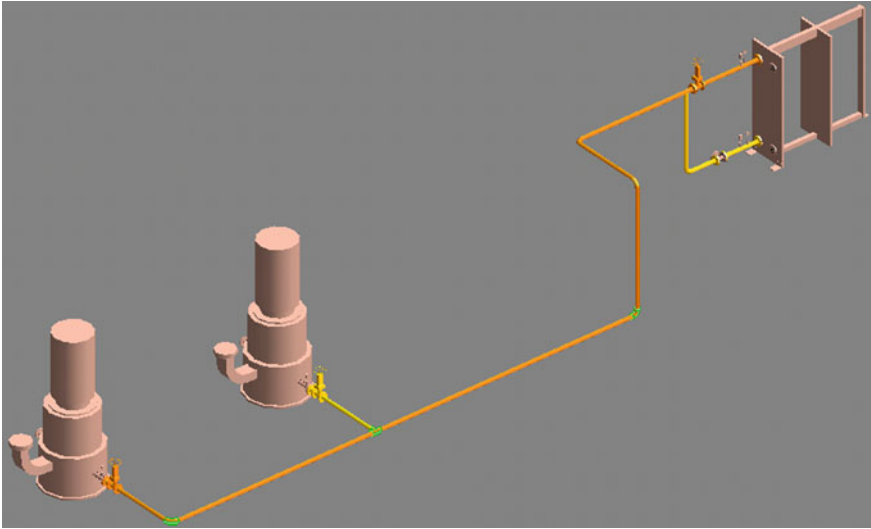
Equipment connectivity model between the lubricating oil pumps and the cooler that are shown in Fig. 22.9
